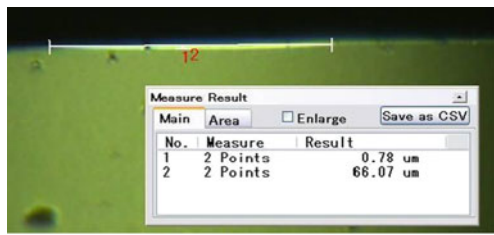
Tool wear of diamond cutting NAK80 using CAMQL system
